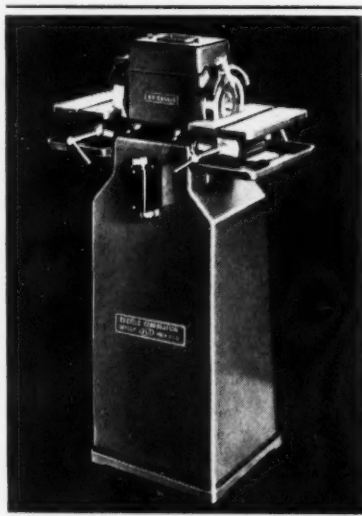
Ex-Cell-O No. 46 Grinder for Cemented-carbide Tools
